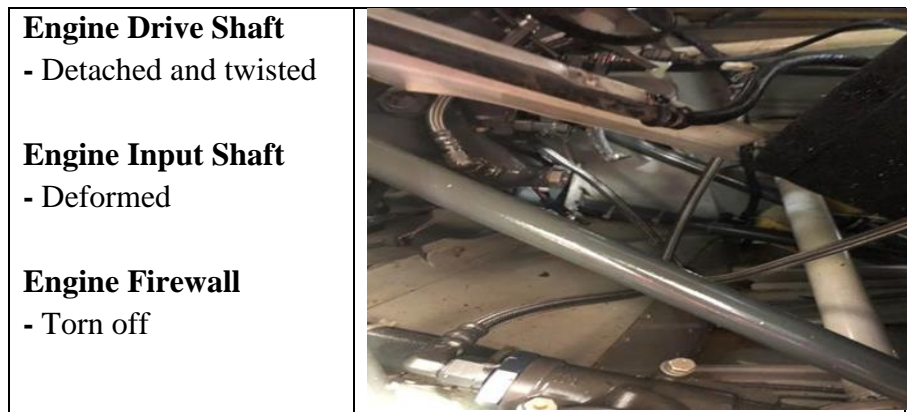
Engine drive shaft, engine input shaft and engine firewall
